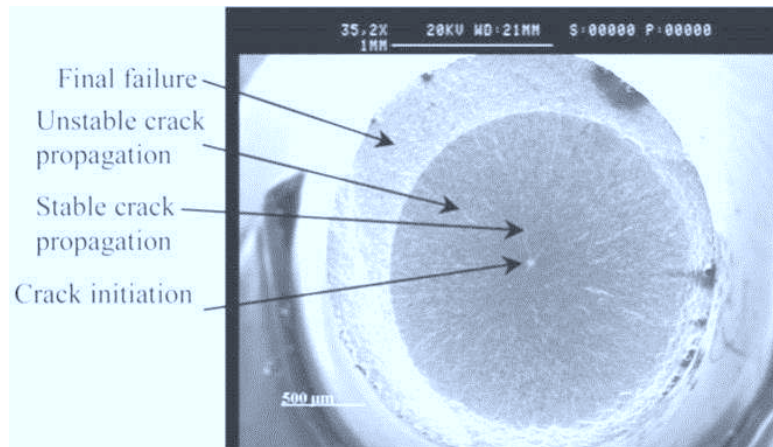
Overview of the gigacycle fatigue fracture surface [Wan02].
